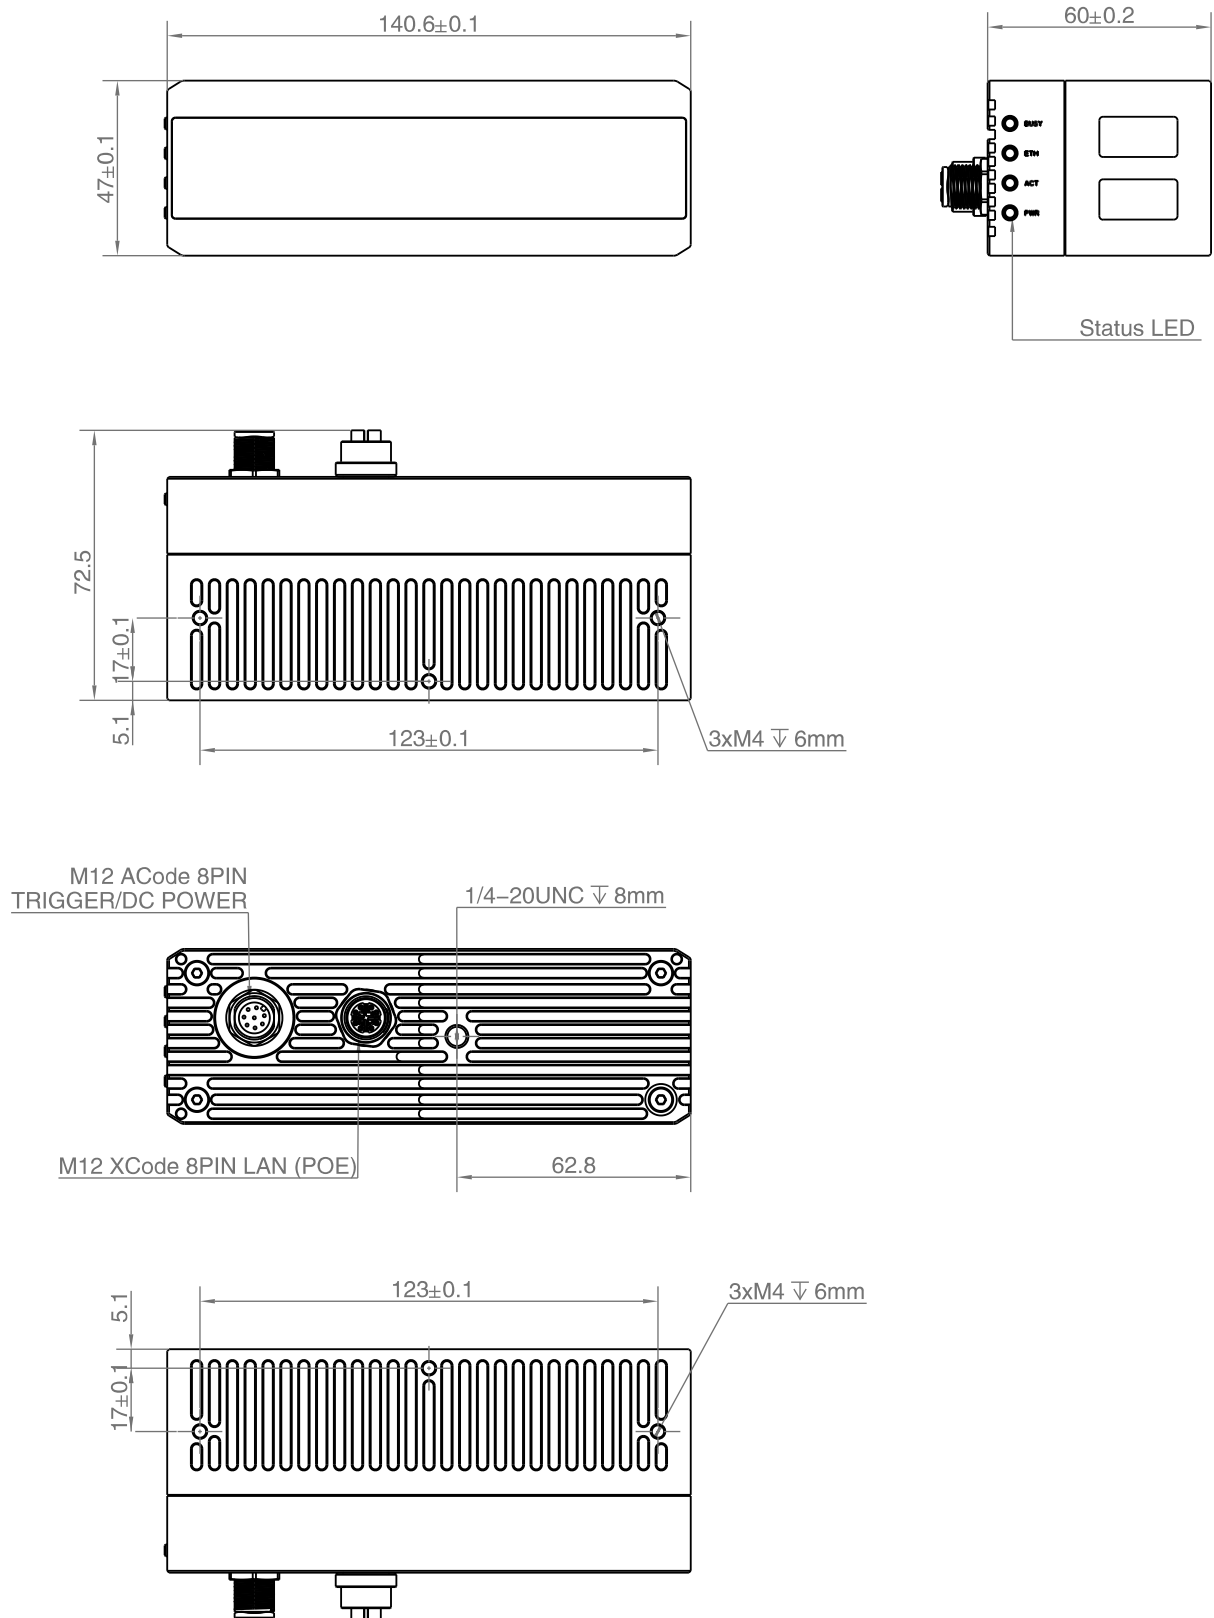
PS800-E1 Mechanical dimensions (unit: mm)
